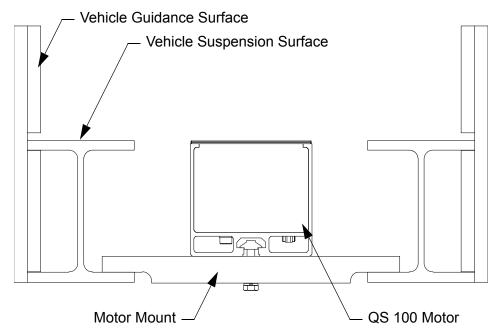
QuickStick 100 Transport System, Guideway Detail
